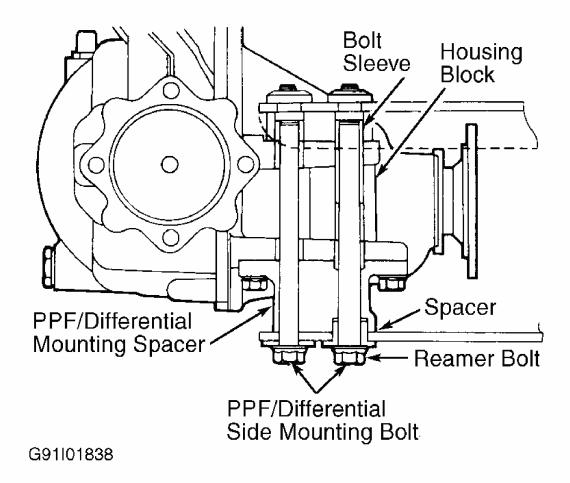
Locating PPF-To-Differential Reamer Bolt, Sleeve & Spacer (Miata) Courtesy of MAZDA MOTORS CORP.
